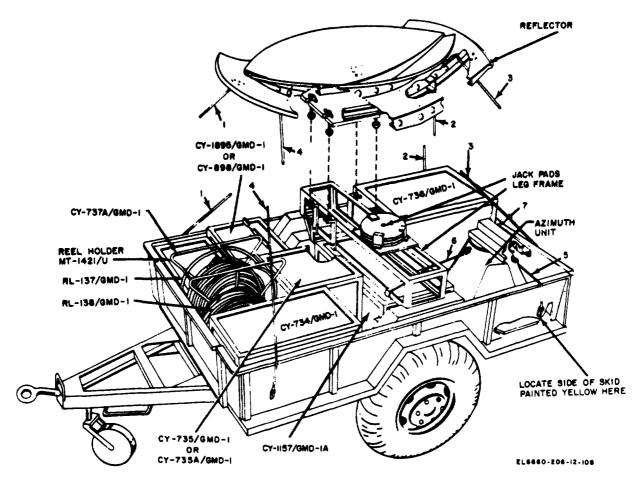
Equipment location for loading rawin set into Ordnance trailer.
